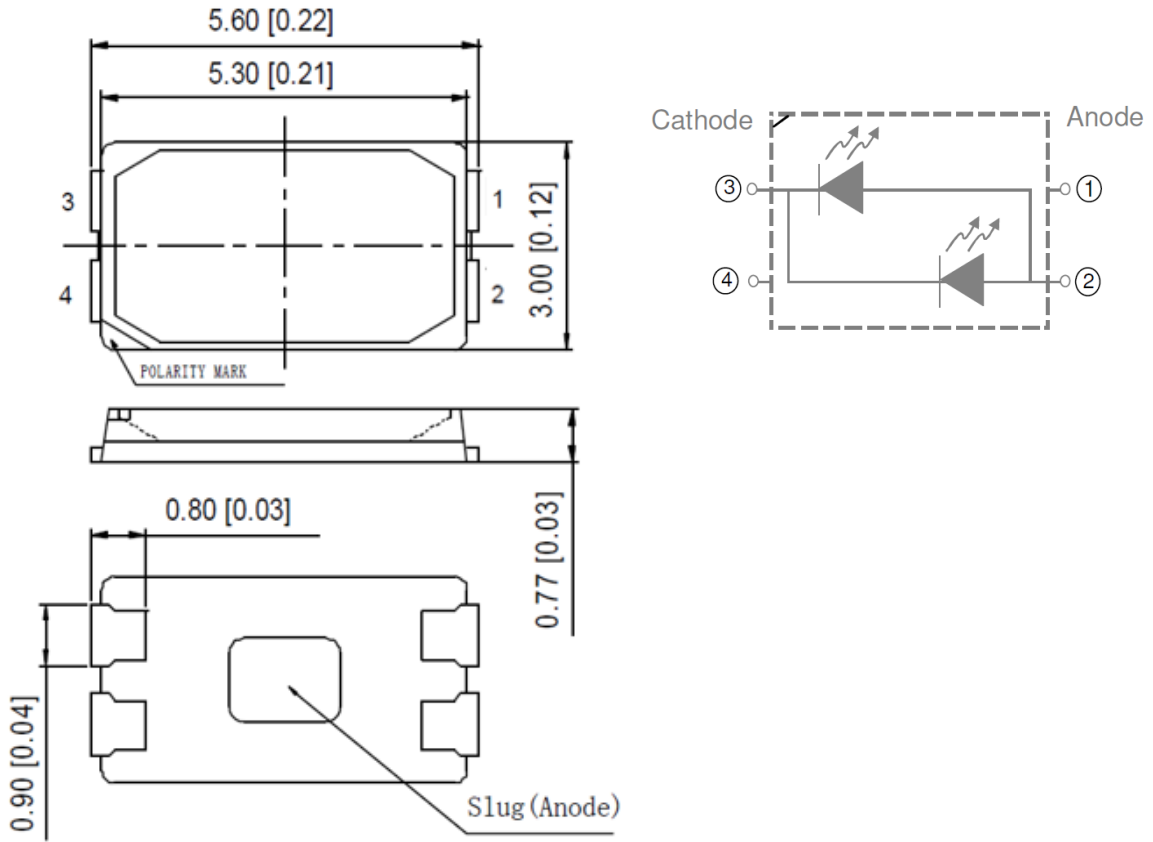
Mechanical drawings of the 5630 package, with unit in millimeter [in inches]
